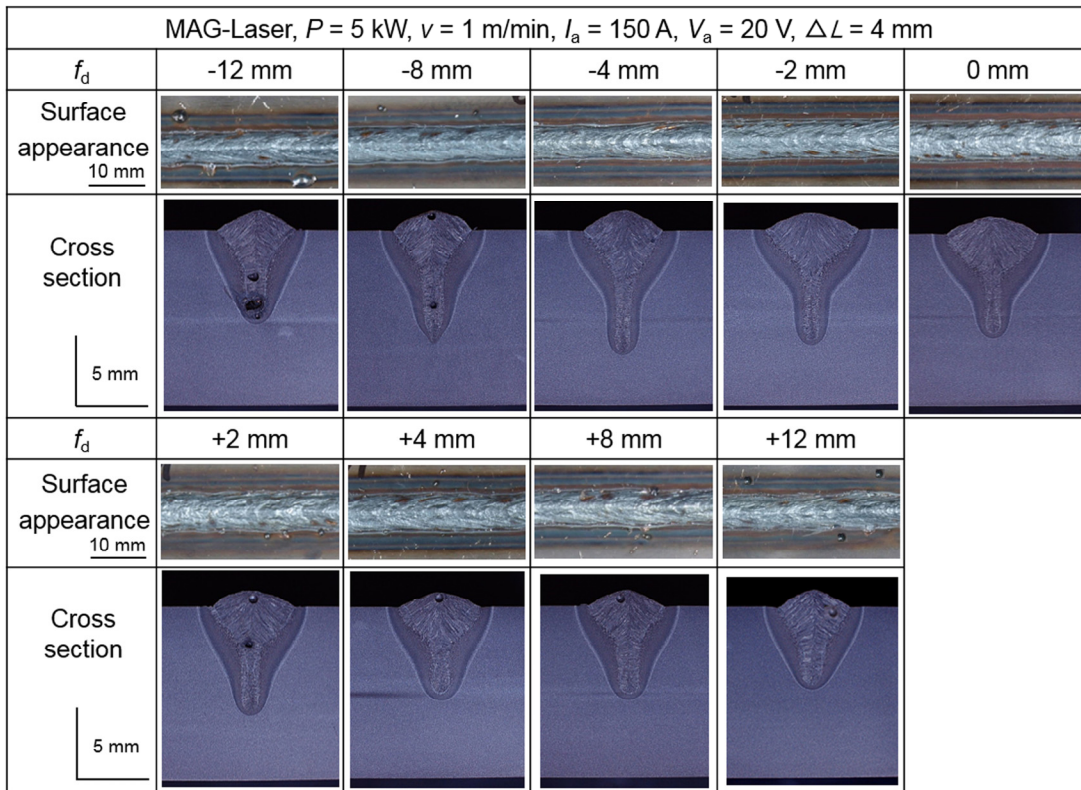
Surface appearances and cross sections of weld beads produced by MAG-Laser hybrid welding at various defocused distances.
